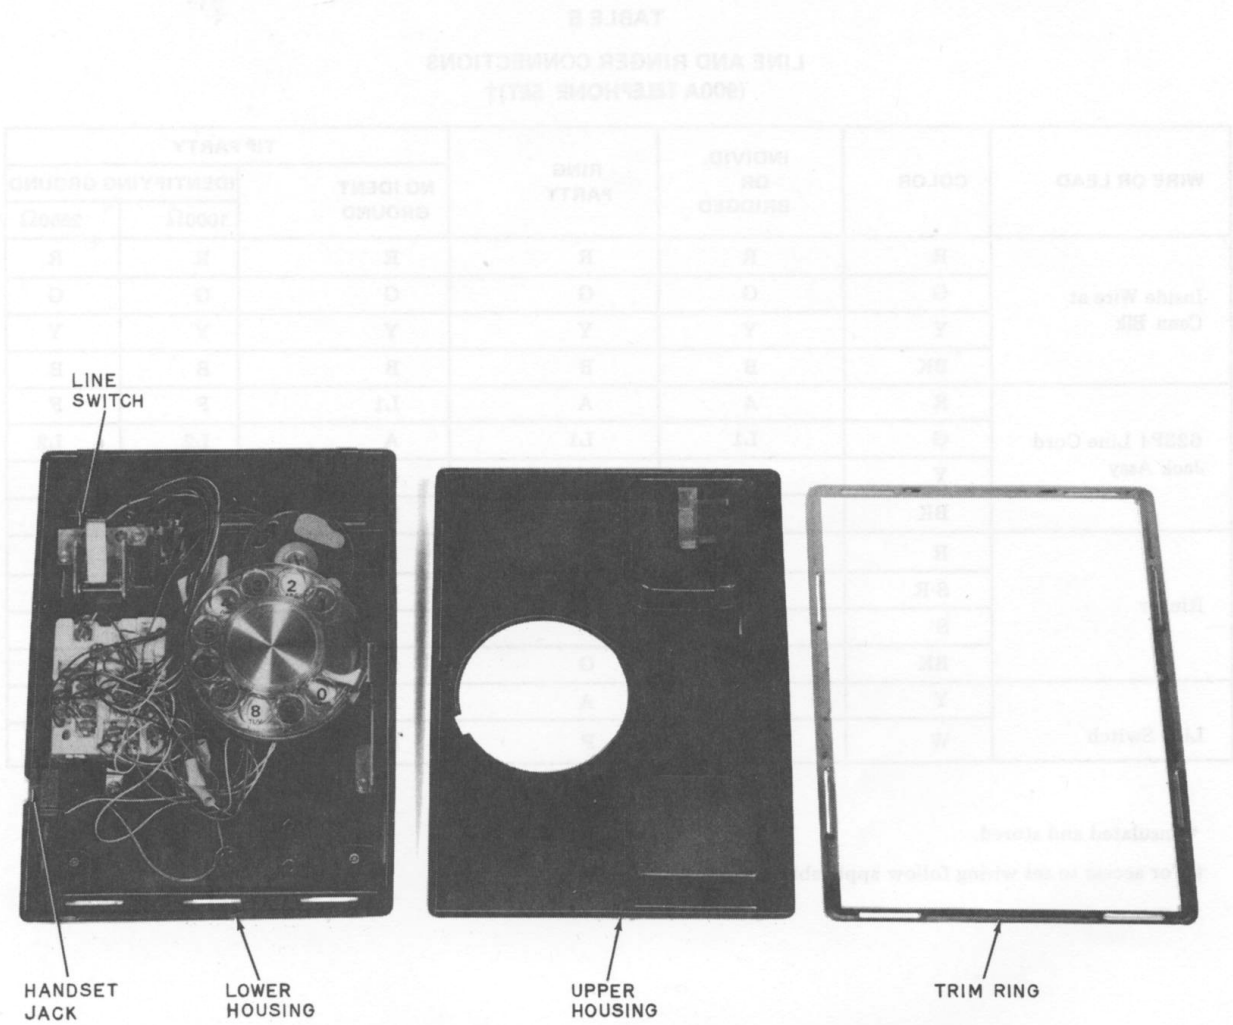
900B Telephone Set With Upper Housing and Trim Ring Removed
